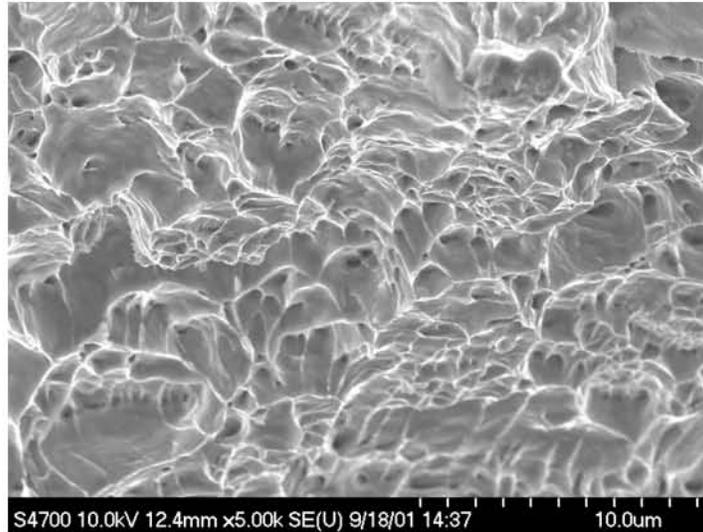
Fracture surface of a room-temperature-tested tensile specimen from the B1 test after ≈ 1 year of exposure. The surface consists of dimples and microvoids, indicating that fracture is ductile.
